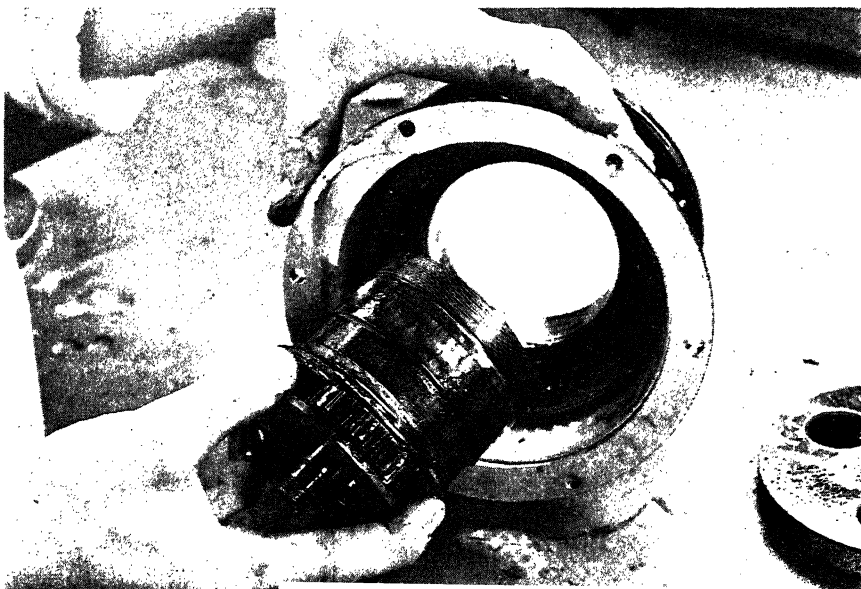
REMOVING CLUTCH ASSEMBLY FROM ITS HOUSING
